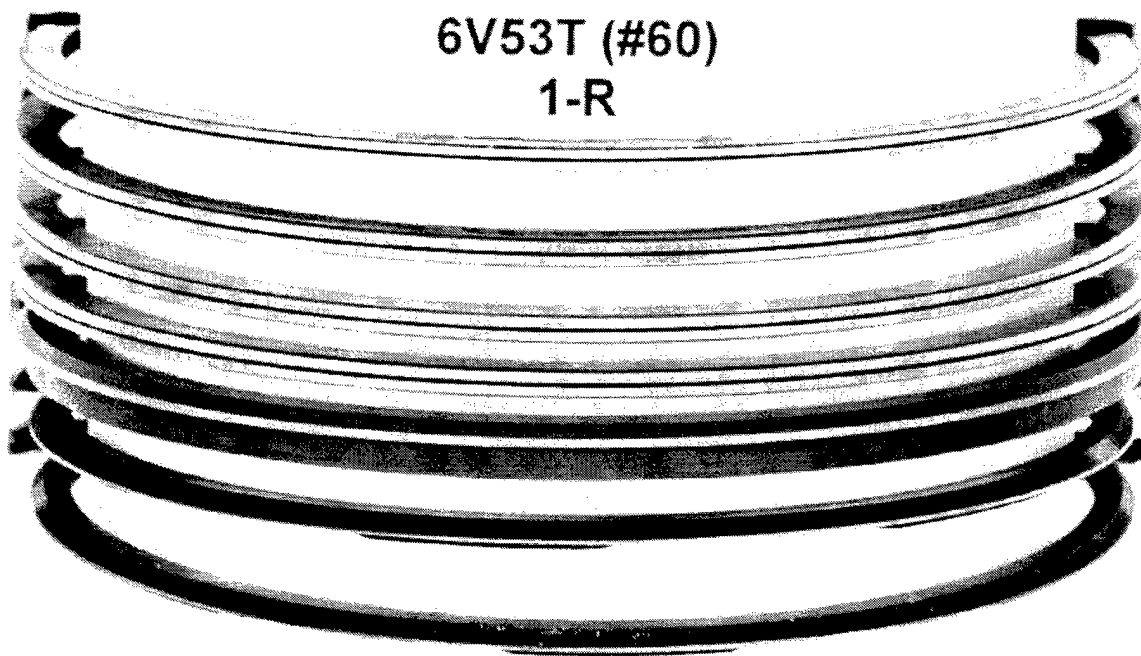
6V53T Test 60, Cylinder 1-R, Rings
